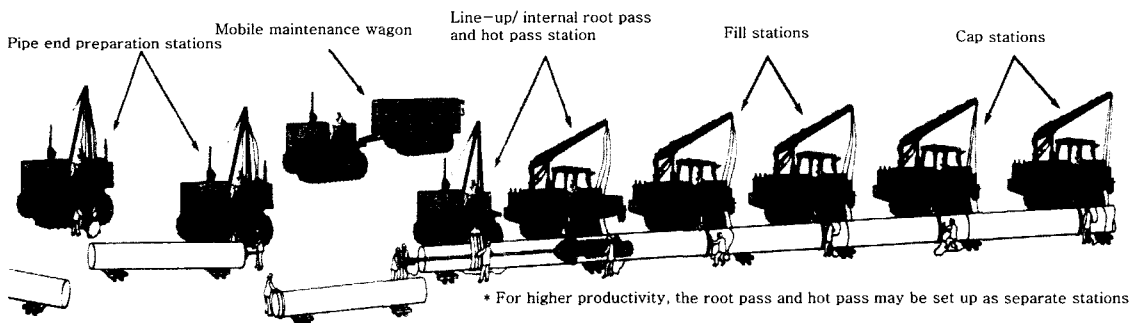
Typical mechanized GMAW pipelay welding spread (source CRC Evans)
